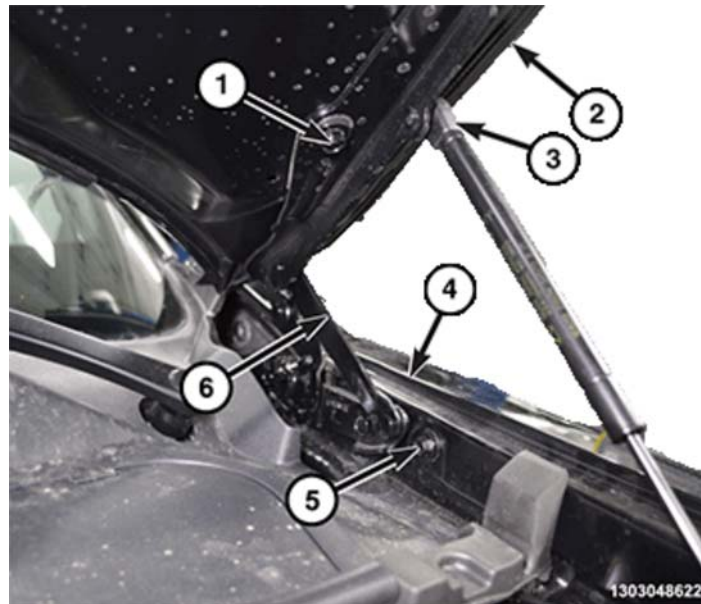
Bolts, Hood, Gas Prop, Body & Hood Hinge
